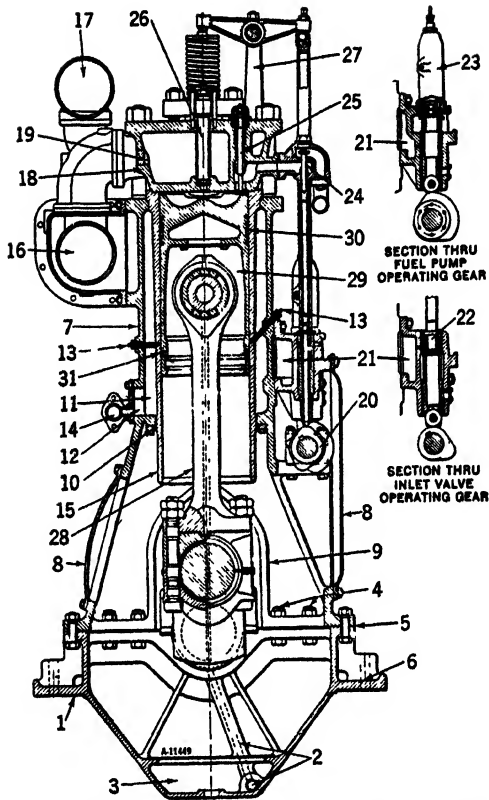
A. —Section through the frame of a Worthington Diesel. 1 = base arranged for concrete, steel, or timber foundation; 2 = cast-in lubricating-oil passage insures against damage by oil-pipe failures; 3 = lubricating oil sump separated from crankcase by screens 4 = bolts holding frame to base; 5 = bolts holding frame to base; 6 = raised lip to keep oil from foundation; 7 = frame in one rigid block from base to cylinder heads; 8 = doors in front and rear; 9 = cross webs of frame; 10 = individually controlled water circulation around each cylinder liner; 11 = cylinder jacket; 12 = cleaning openings, allowing access to liner and jacket; 13 = cylinder lube-oil feed; 14 = water header; 15 = removable cylinder liner with metal-to-metal joint, secured on top of frame only; 16 = water-cooled exhaust header; 17 = air intake manifold for outside connection or air filter; 18 = cylinder head; 19 = plug; 20 = camshaft in horizontally adjustable bearings; 21 = pump-filled, lube-oil reservoir for tappet lubrication; 22 = spring-supported pushrod; 23 = individual fuel pumps operating without pushrods or levers; 24 = camshaft-controlled, air-starting pilot valve for each cylinder; 25 = air check valve; 26 = fuel spray valve; 27 = rocker-arm shaft; 28 = connecting rod; 29 = piston; 30 = piston rings.
